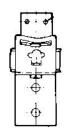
Front Bezel Assembly A007637-01 thru -07 D
